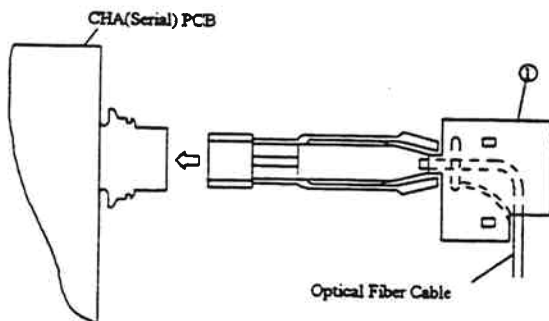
Connection of Optical Fiber Cable
